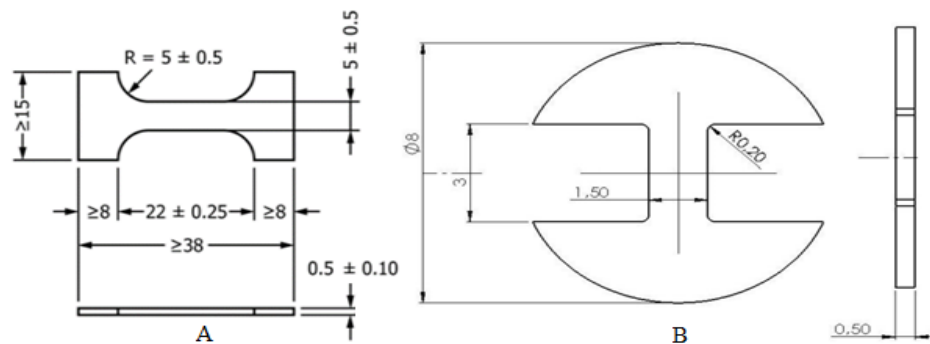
(A) Dimension of ASTM D1708 micro-tensile specimen [9]; (B) Dimension of micro-X tensile specimens [8] (all dimensions are in mm)
